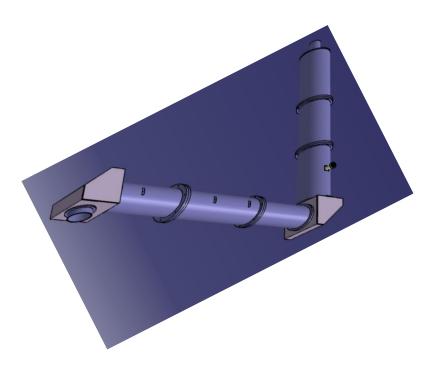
Design drawing of the visible light viewing module of SWORD.
